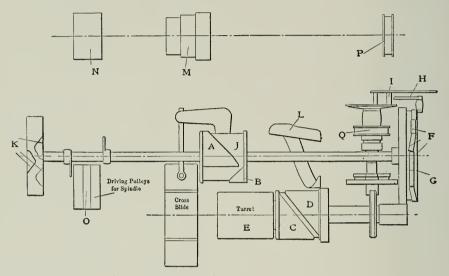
Camming Diagram, Cleveland Automatic Turret Machine
